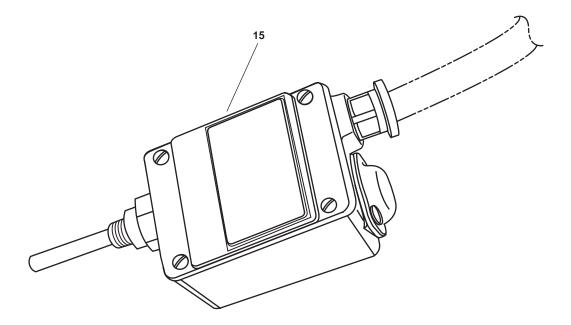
Arms Storage and Radio Room Alarm System (Sheet 4 of 4)
